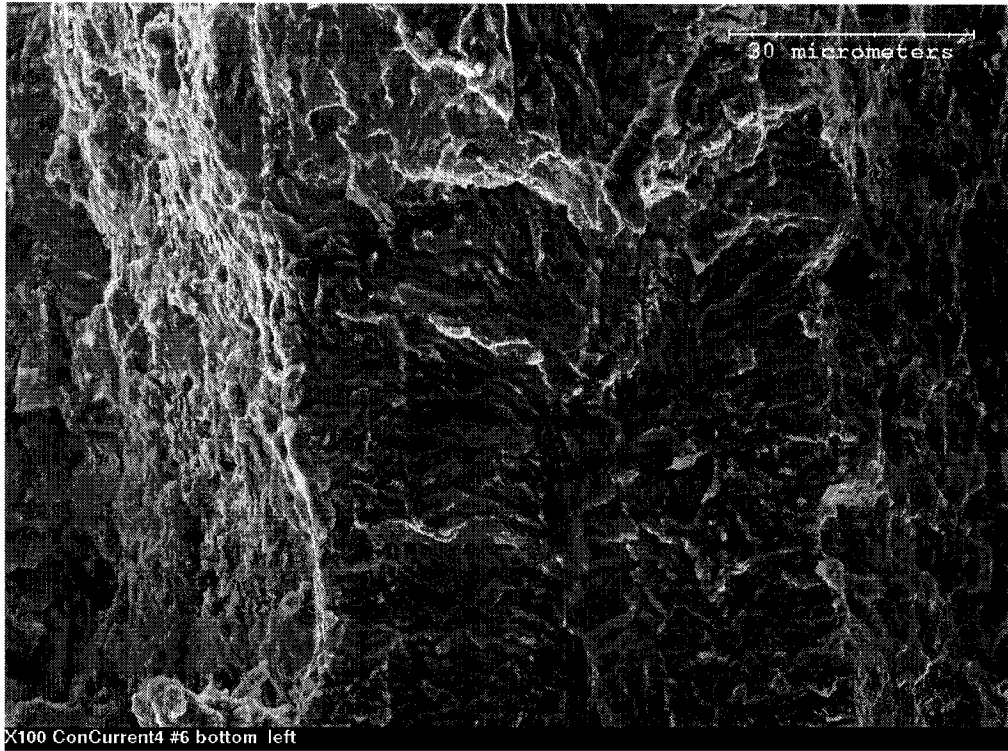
Fracture surface of X100 concurrent sample #6 (high mag)
